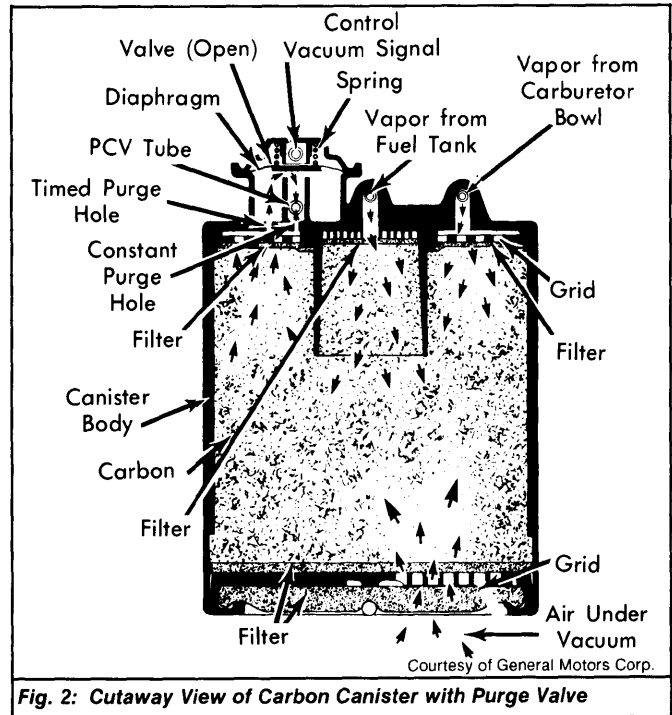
Cutaway View of Carbon Canister with Purge Valve
